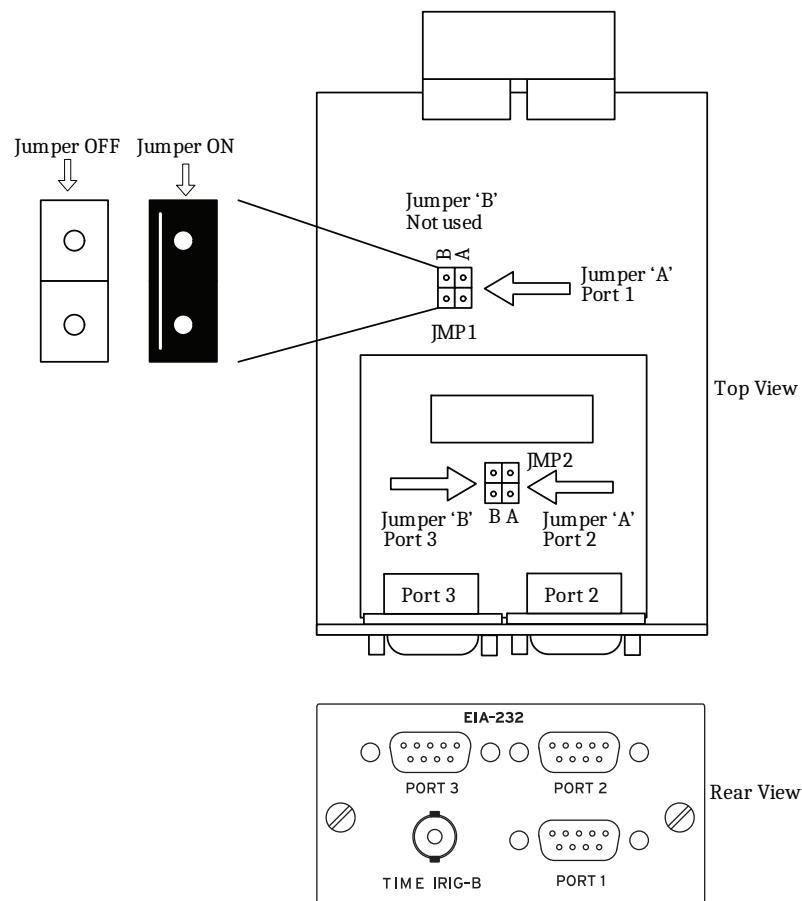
Main Components of the EIA-232 Board, Showing the Location of Serial Port Jumpers JMP1 and JMP2
